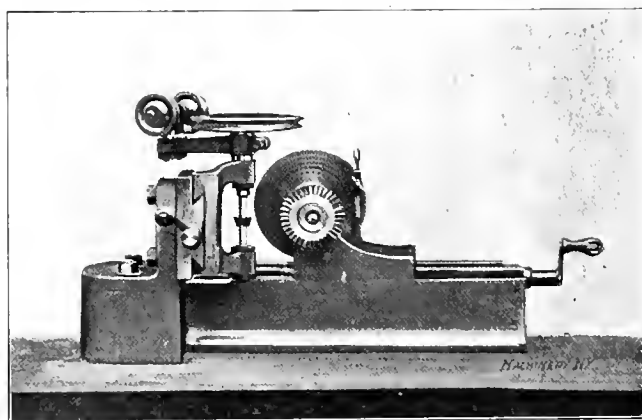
Cutter Forming Machine, Joseph Whitworth & Co. (1868)
